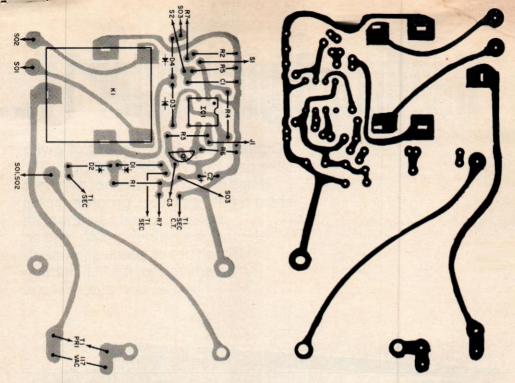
Foil pattern for PC board is at right, component layout shown at left.
